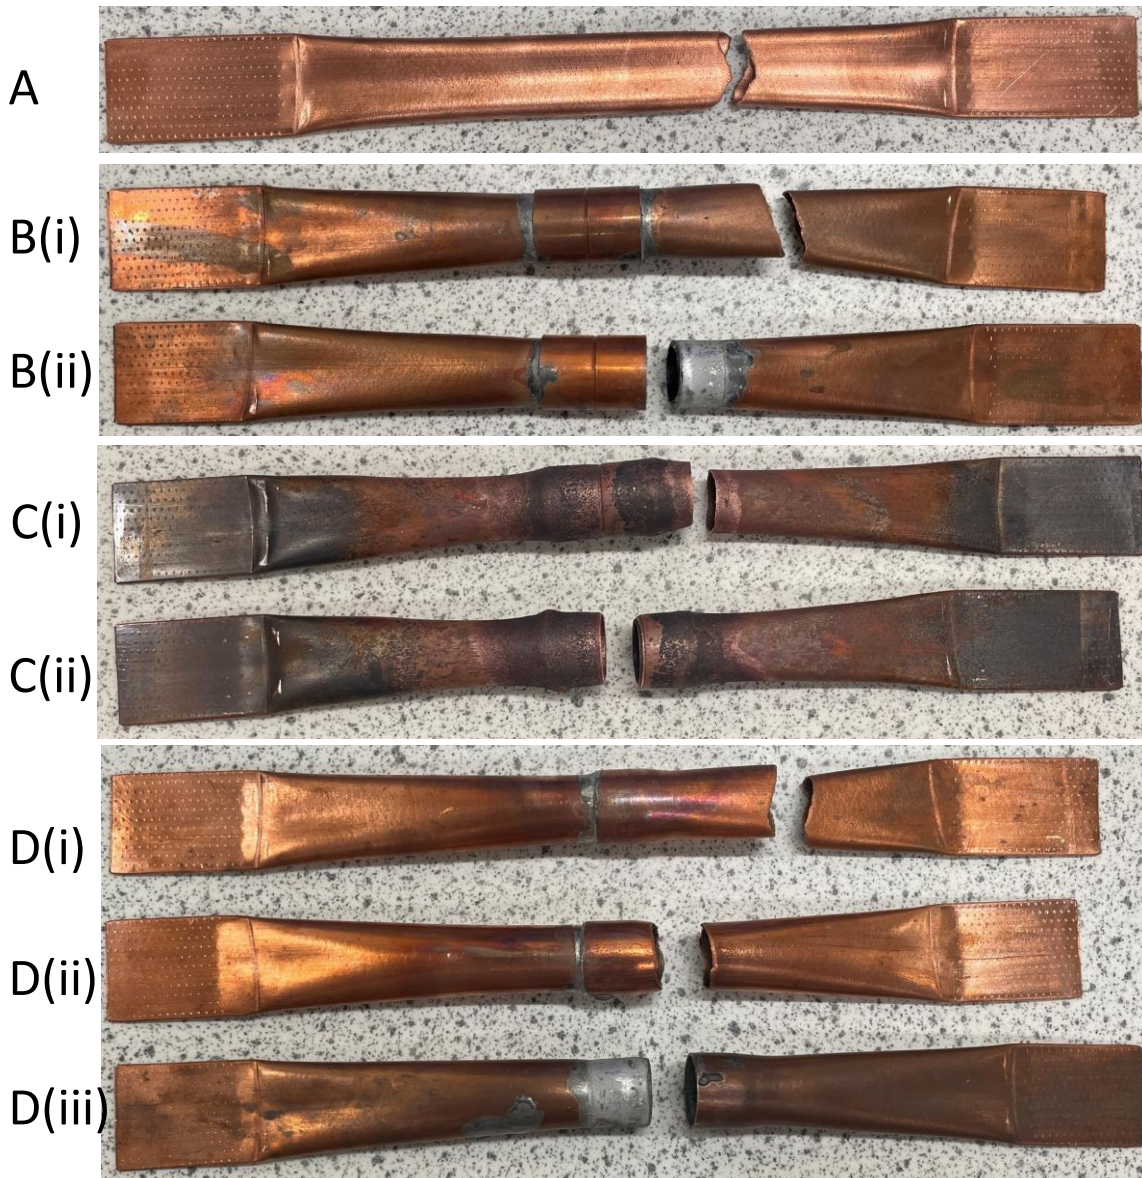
Failure modes for specimens for: A, pipe failure; B, soldered coupler joints for (i) pipe failure and (ii) joint failure; C, brazed coupler joints exhibiting (i) pipe failure and (ii) coupler failure; and D, swaged joints with (i) pipe failure, (ii) pipe – near joint failure, and (iii) joint failure.
